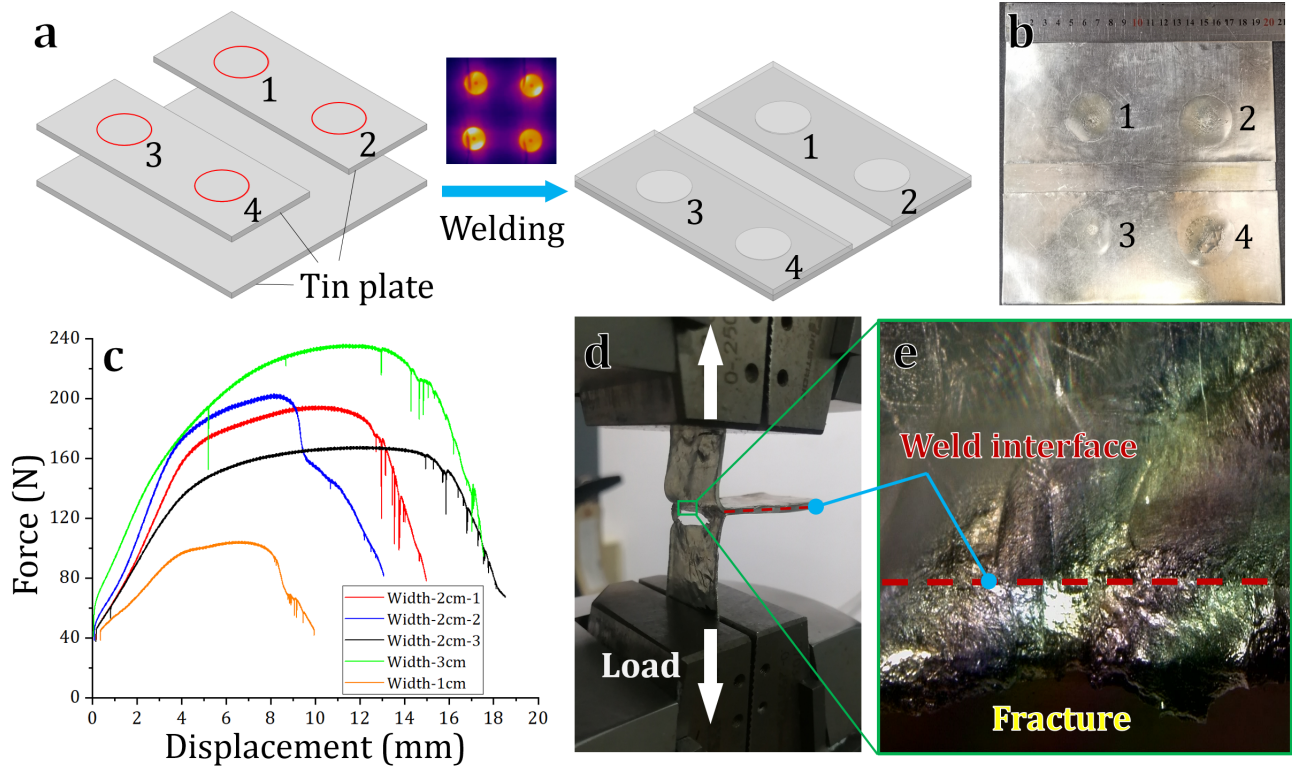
Multi-zone microwave welding of tin plates: (a) illustration of the welding process; (b) photograph of the welded tin plate; (c) load-displacement curves of specimens with varying widths; (d) photograph of the fracture failure mode; (f) optical microscopy of the welded interface.
